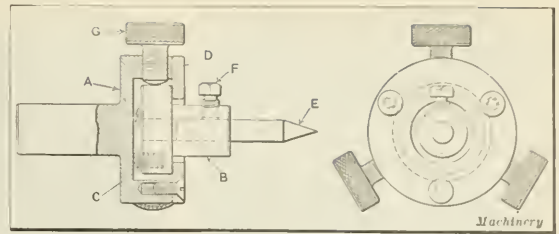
Design of Efficient Recessing Tool that is used in Drill Press
